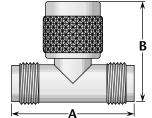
(Tee plug-jack-plug; connects two jacks and one plug)
